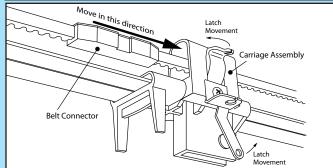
Engage Chain/Belt Connector to Carriage.
